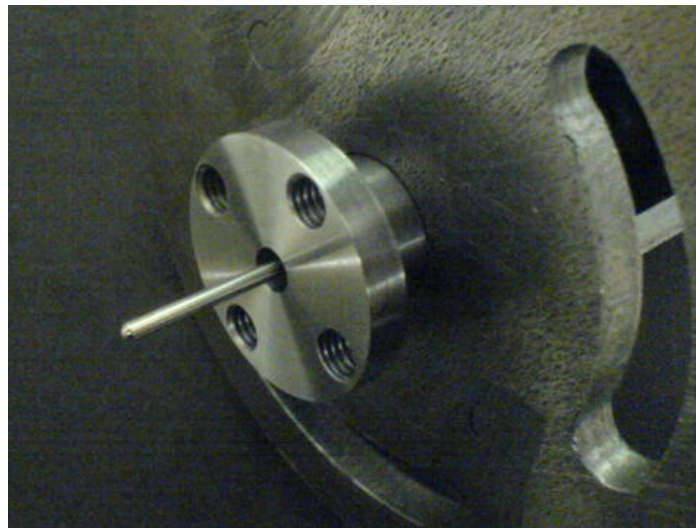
Optical Nozzle Adaptor Attached to Injector Body and Pintle
